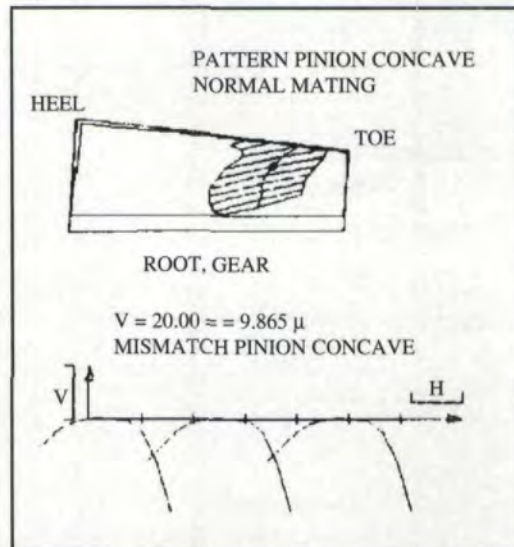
Contact area and single-flank gear generating error of a gear set (original design).
